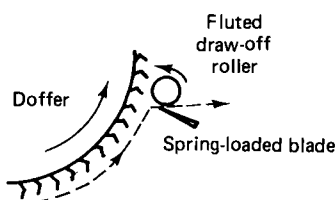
Fluted draw-off roller and blade as may be used in semi-worsted carding
